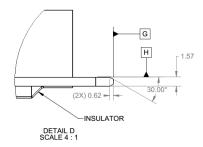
Large Form Factor Keep Out Zone – Side View – Detail D
